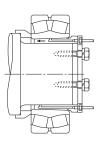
Mounting with Special Sleeve and Hydraulic Pressure
